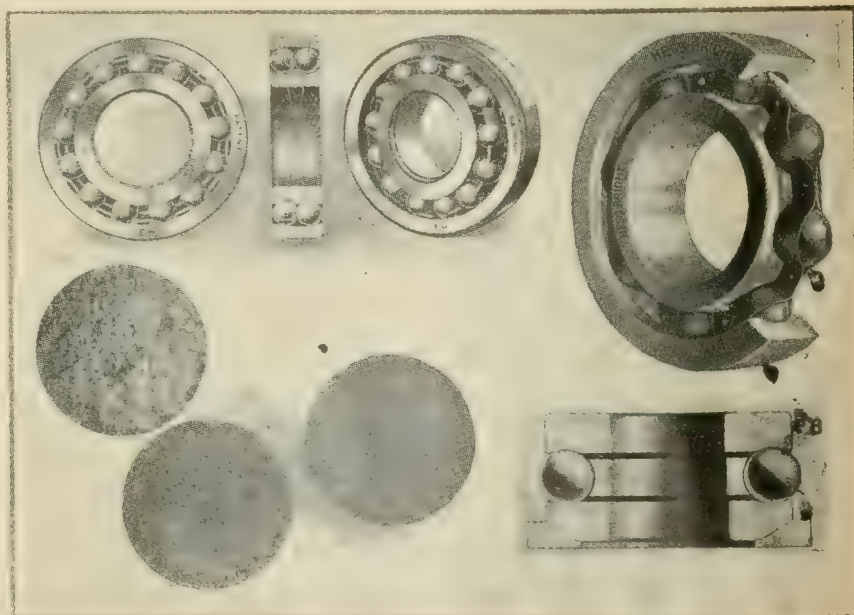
LEFT UPPER VIEW. FIG. 6. LEFT LOWER VIEW. FIG. 7. RIGHT UPPER VIEW. FIG. 11. - RIGHT LOWER VIEW.
